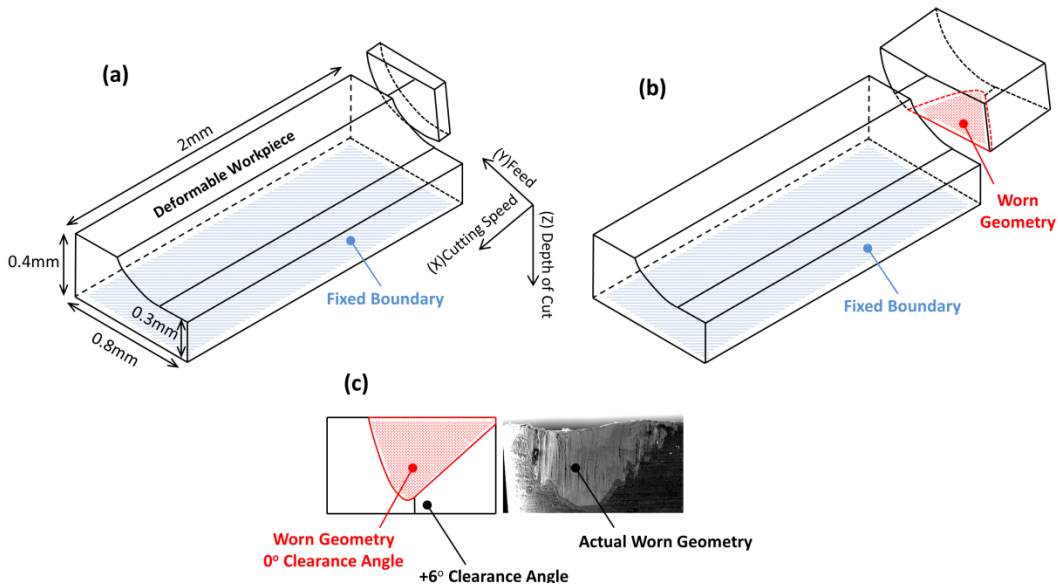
3-D chip formation model, (a) workpiece dimension with sharp tool model, clearance angle $+6^\circ$, (b) updated geometry of the tool with 0° clearance angle at wear land and (c) comparison of actual wear land and the model of worn tool in XY-plane
